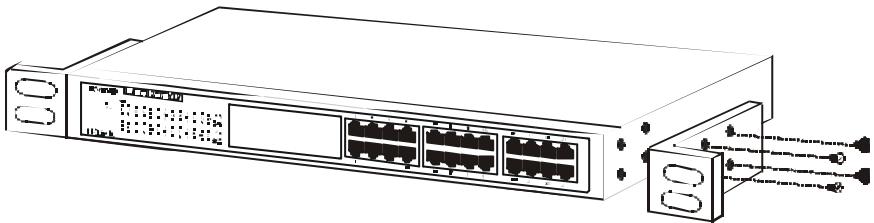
Attaching the mounting brackets to the 10/100 Fast Ethernet Switch
